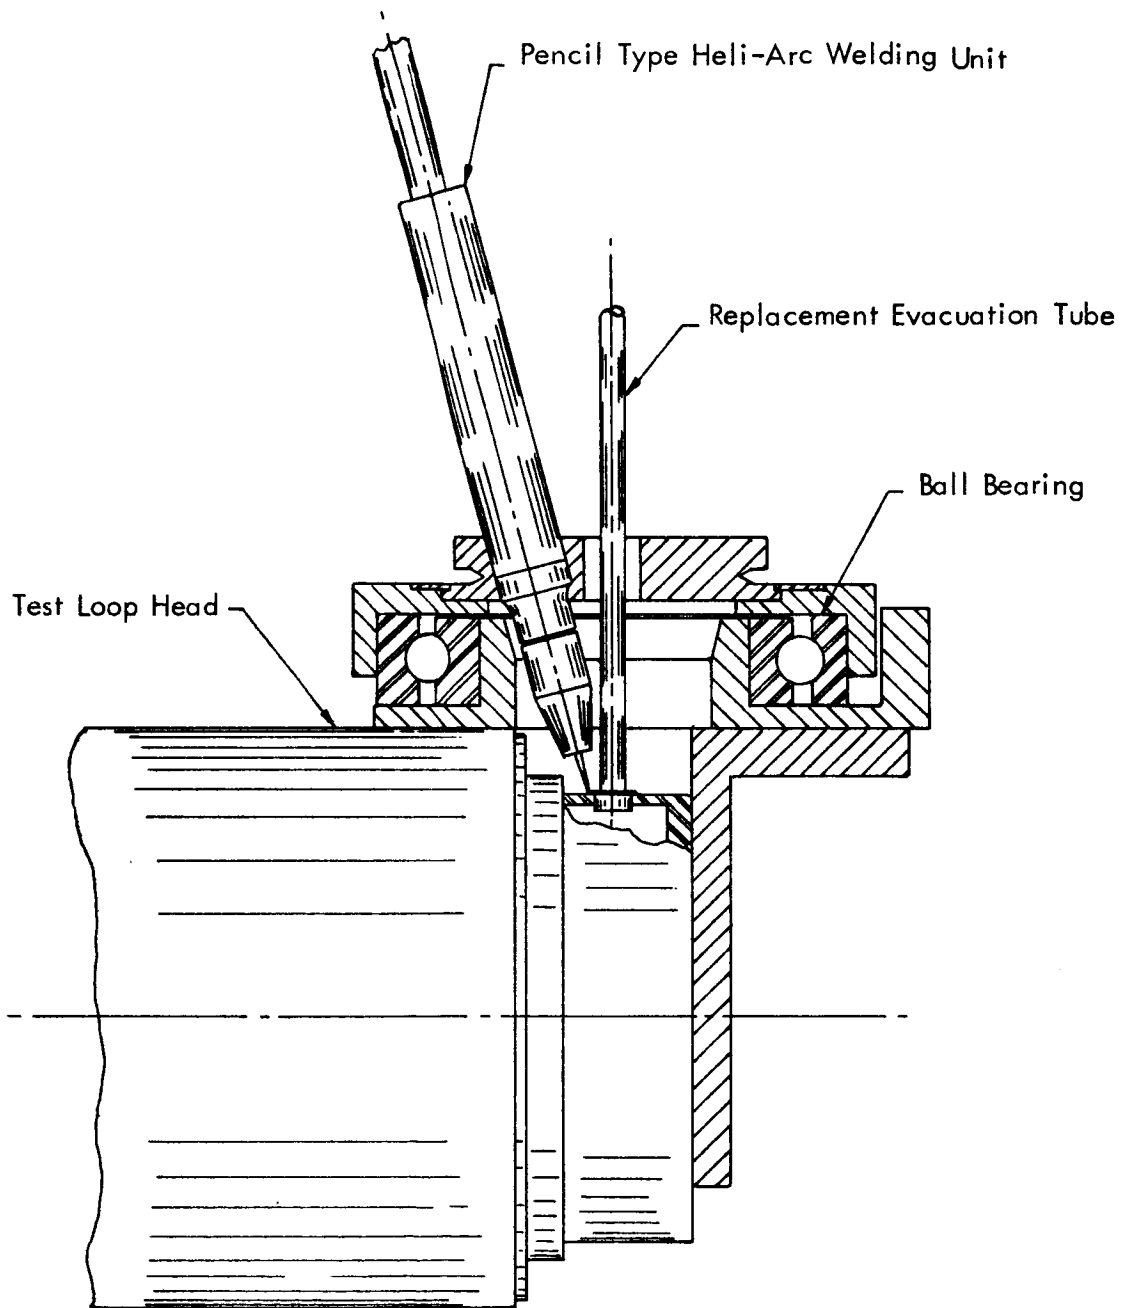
REMOTE HANDLING WELDING FIXTURE
